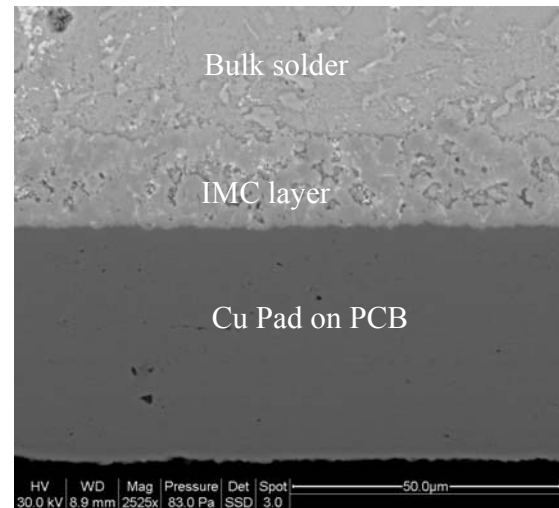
Solder/pad interface in mixed assemblies after five replacements
